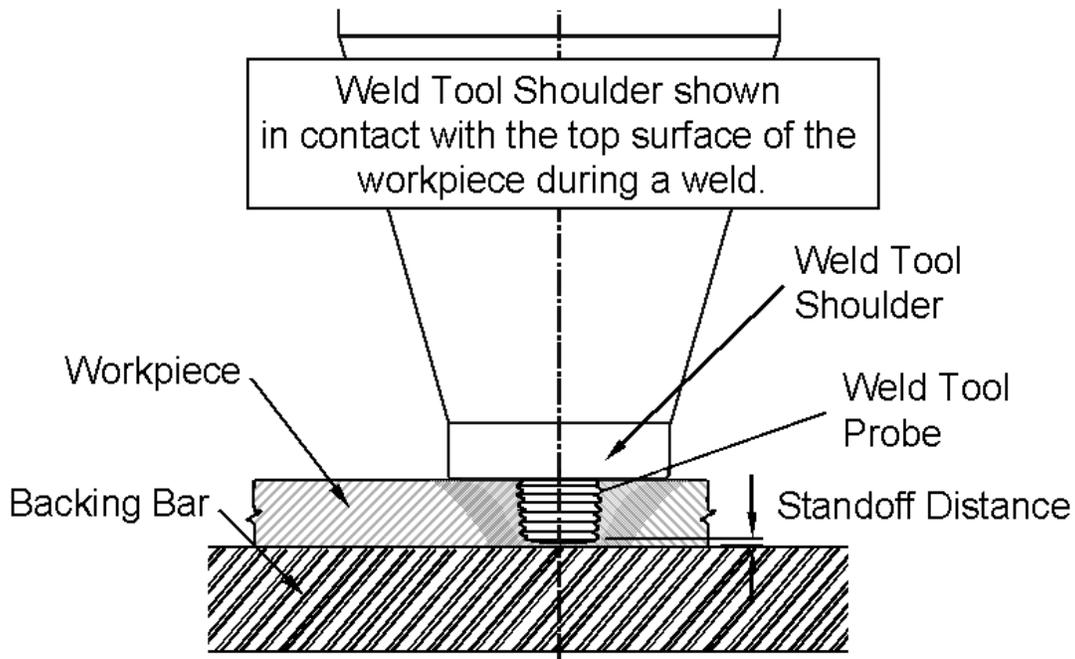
Cross section of a simple friction stir-welded butt joint with the weld tool at full depth [14]
